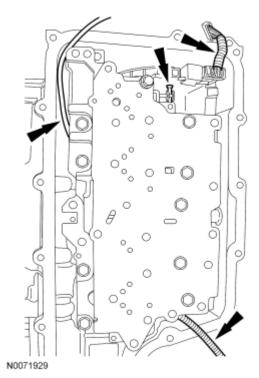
Identifying TSS Sensor & Bolt Courtesy of FORD MOTOR CO.
